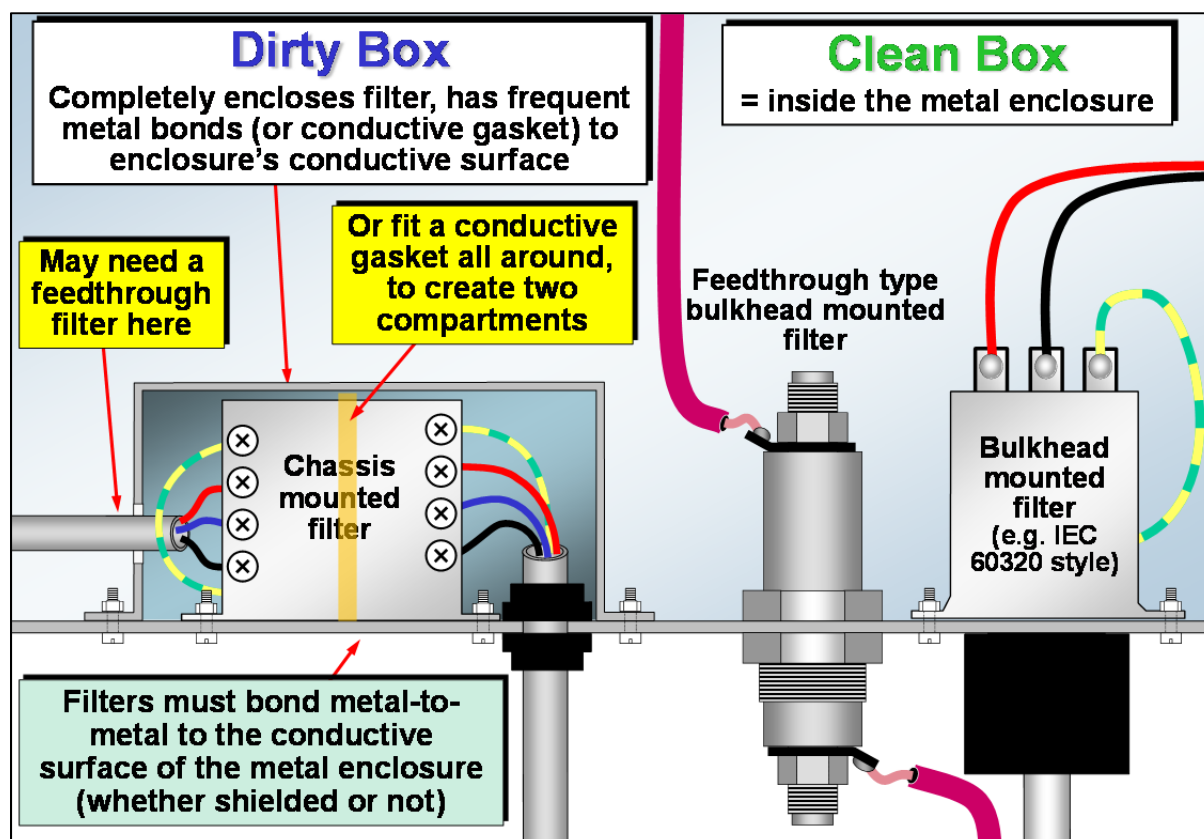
Good assembly techniques for filters in metal enclosures
